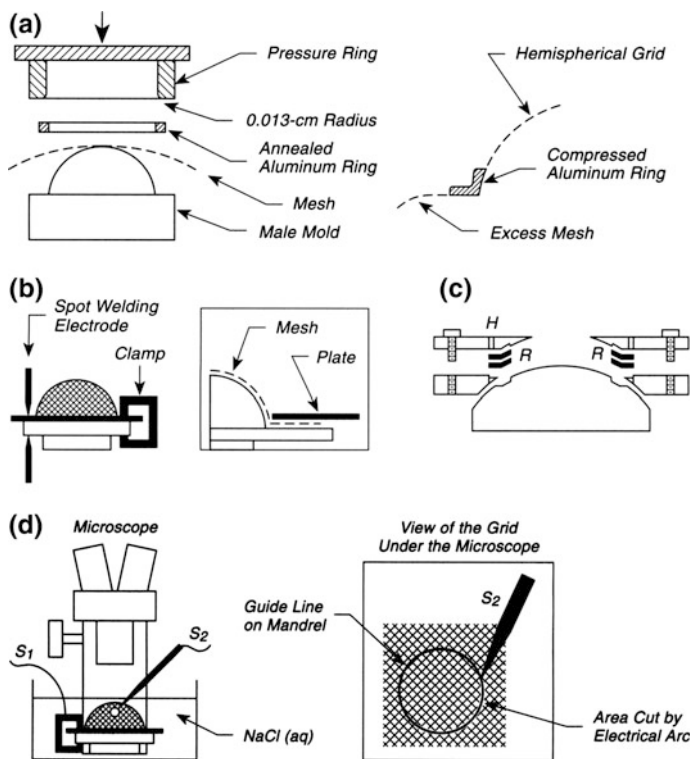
Hemispherical grids—formation and Piercing. a Grid capture—Al Ring. b Grid capture—spot welding. c Grid capture—spot welding. d Piercing grid
